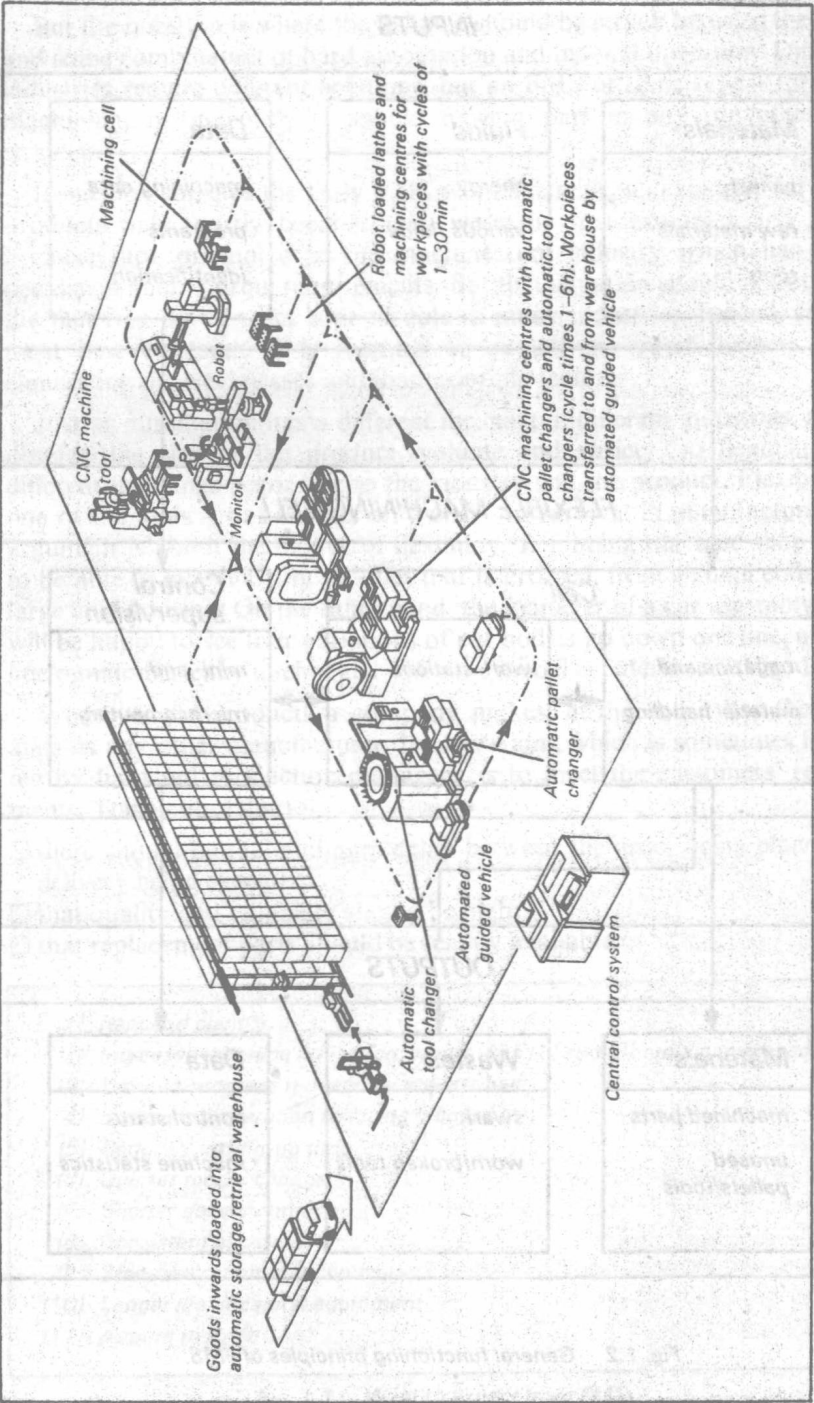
The principle of FMS: machines that can work on a variety of components unmanned, with automated tool and workpiece changing. Delivery of workpieces is by unmanned trolley
